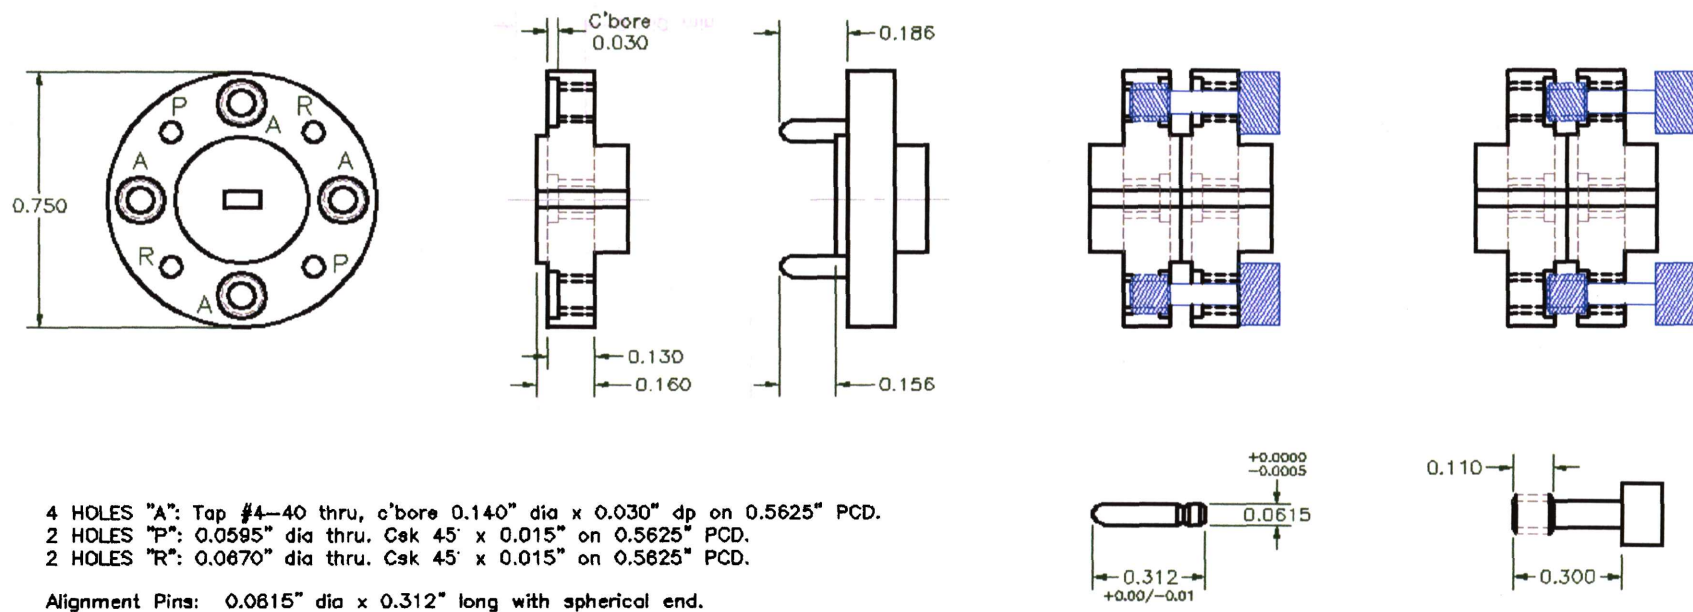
The standard Mil-F-3922/67B flange with its raised central boss. The right hand diagrams show a pair of flanges engaged with the screws inserted and withdrawn.
